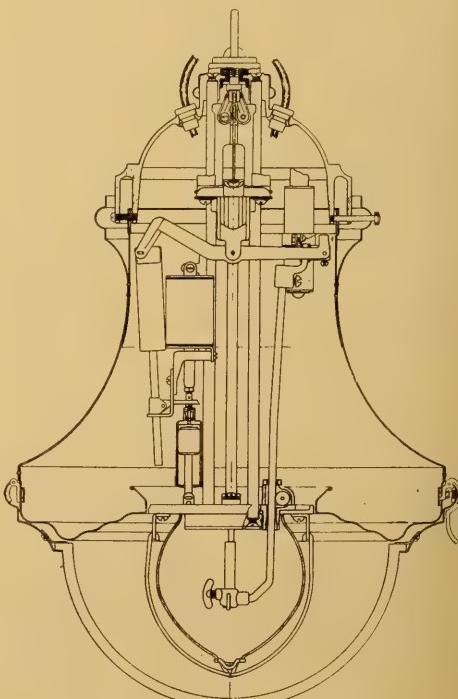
SECTION THROUGH INTENSIFIED ARC LAMP.
